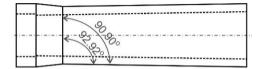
Geometry of the shroud pipe (ladle shroud) used in the water model tests
